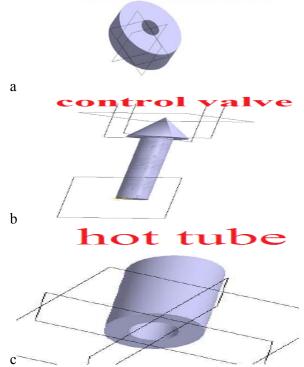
Basic design and modeling of vortex tube parameters:(a)diameter orifice and (b) the control valve (c) the hot tube
